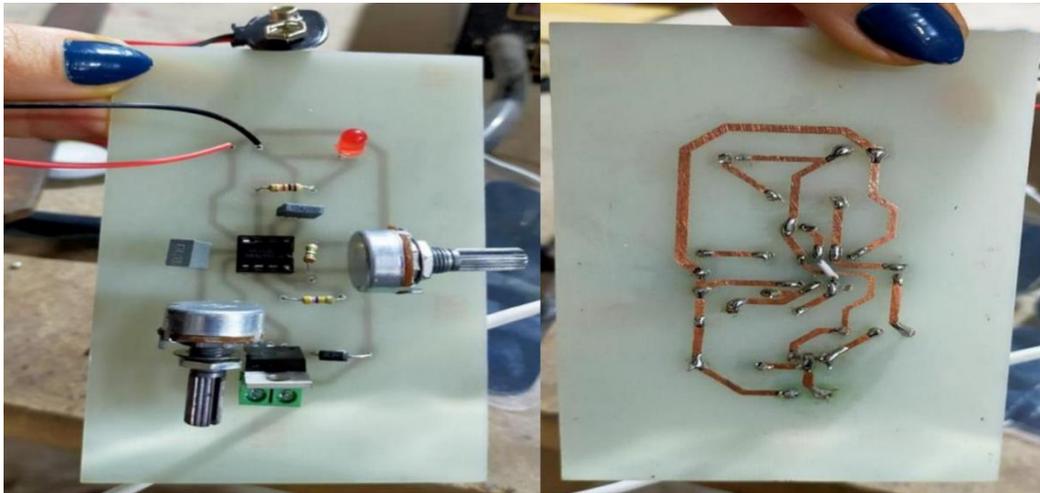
Front view and soldered rear view of the circuit elements on the pertinax
